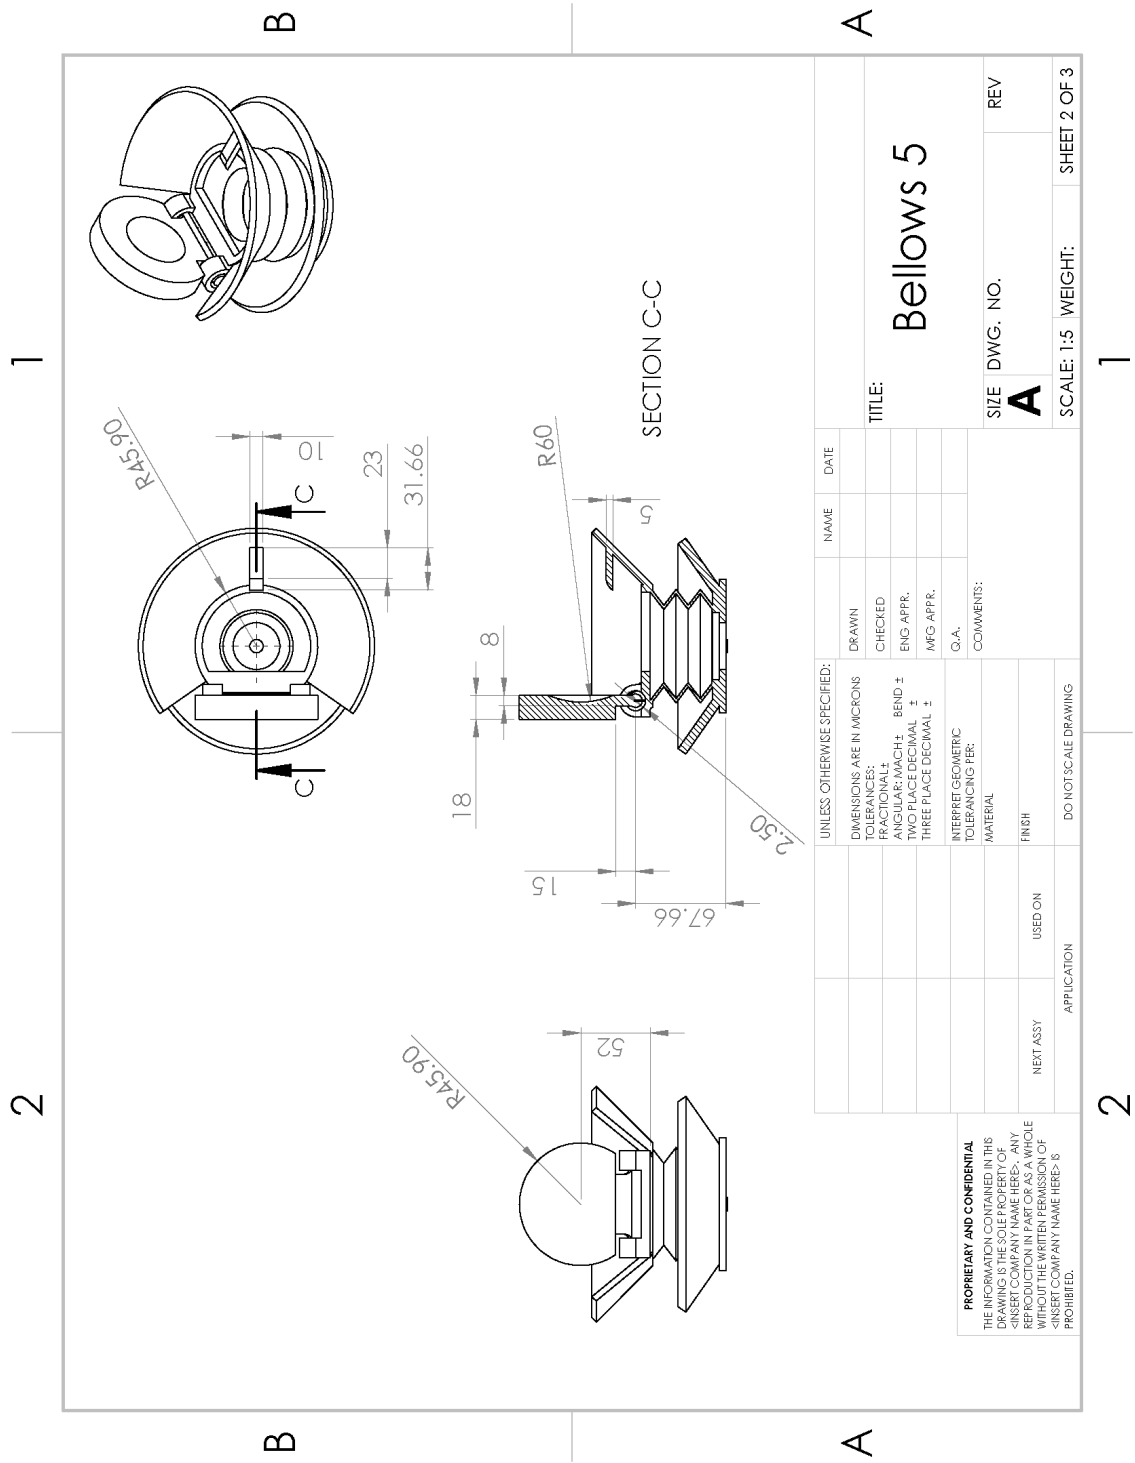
Technical drawing of the spring-body pressure sensor, page 2.
